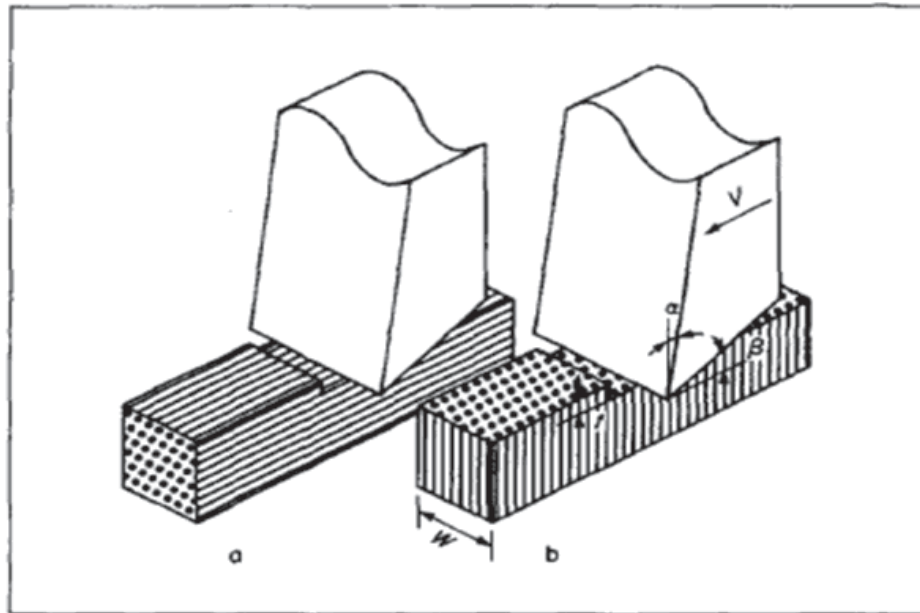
(a) Parallel Direction cut (b) Perpendicular direction cut [13]
